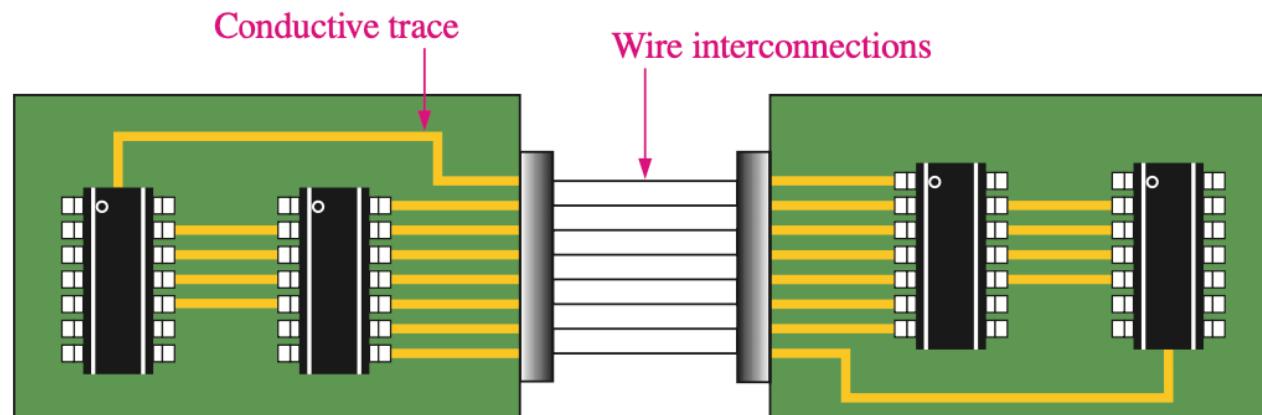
Conductive traces on PCBs and wire interconnections between boards.
